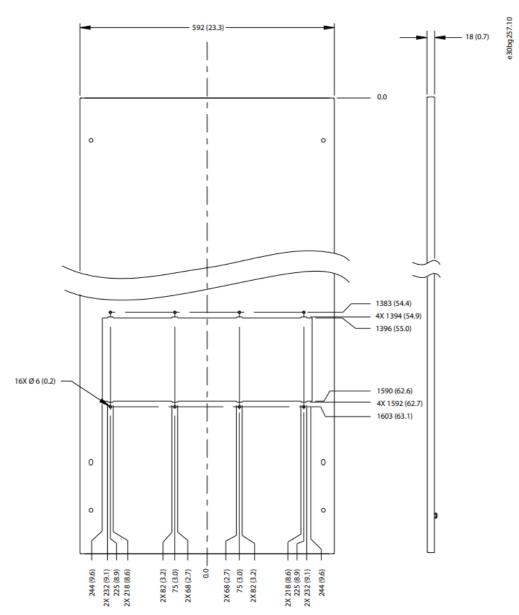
Vent Dimensions for Backplate in 600 mm (24 in) Cabinet
